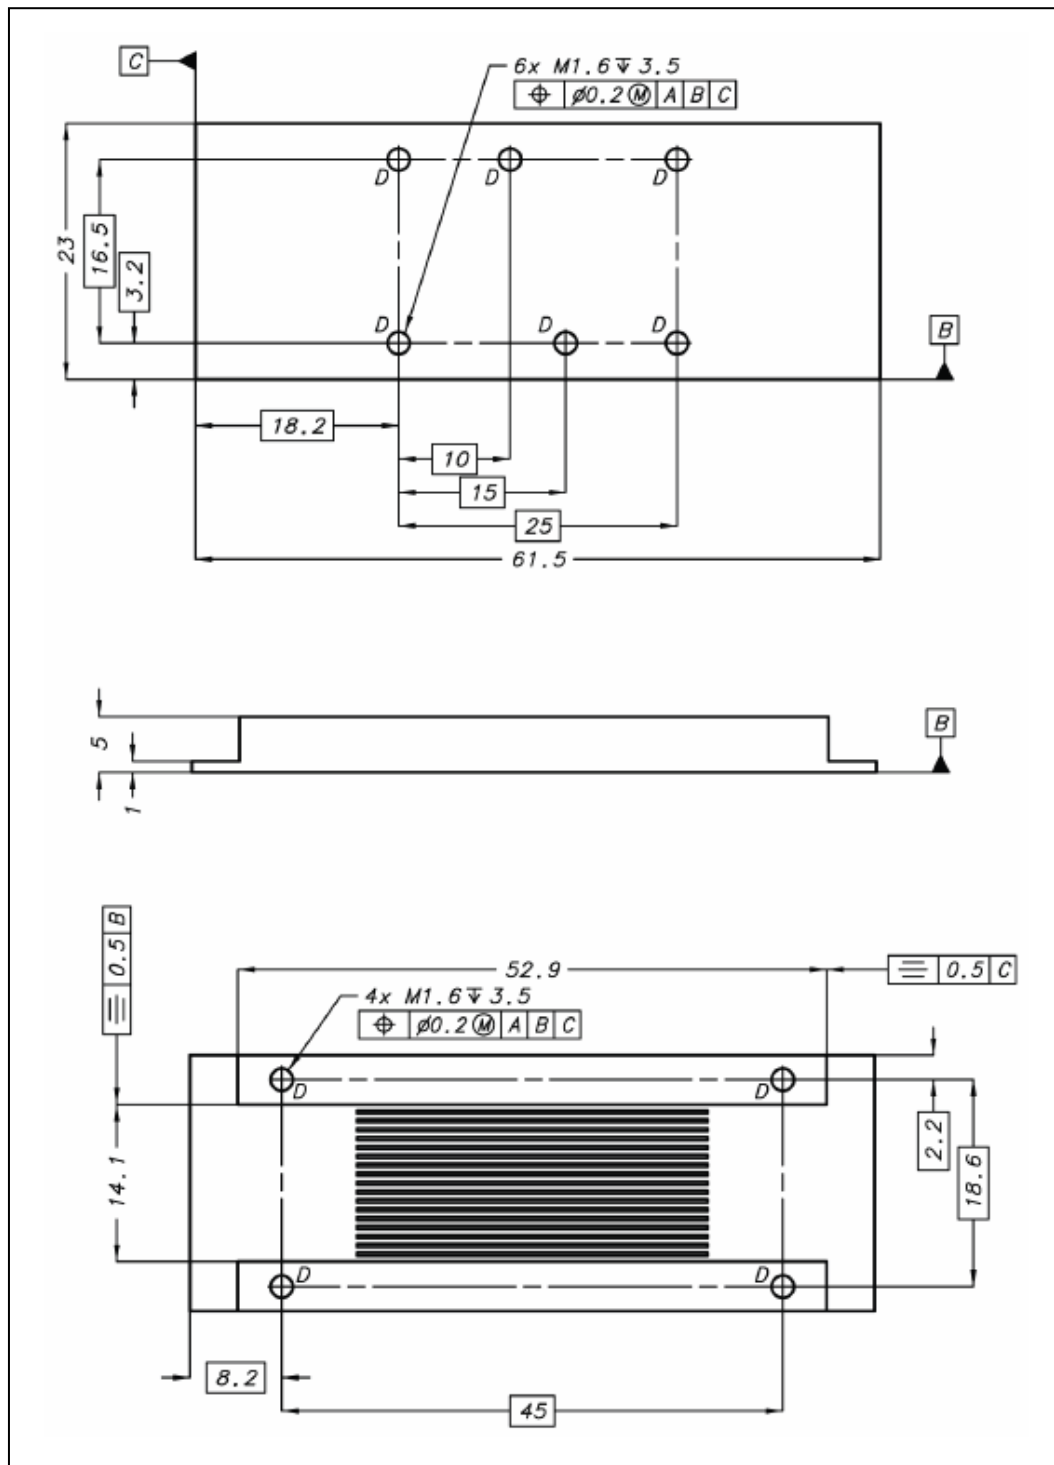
500  $\mu\text{m}$  heatsink body dimensions
